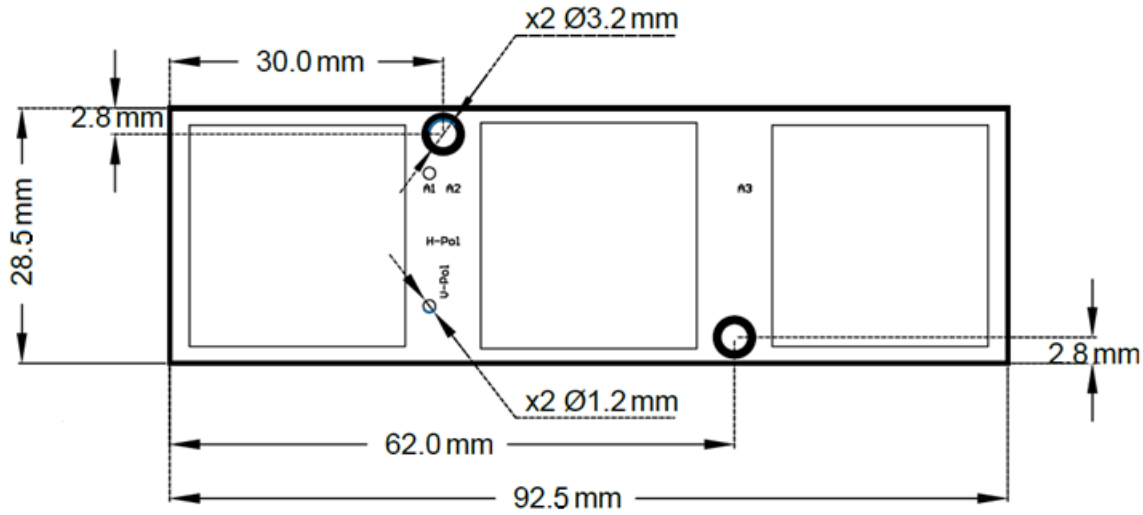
Physical dimensions of the ANT-B11 board (Top view)
